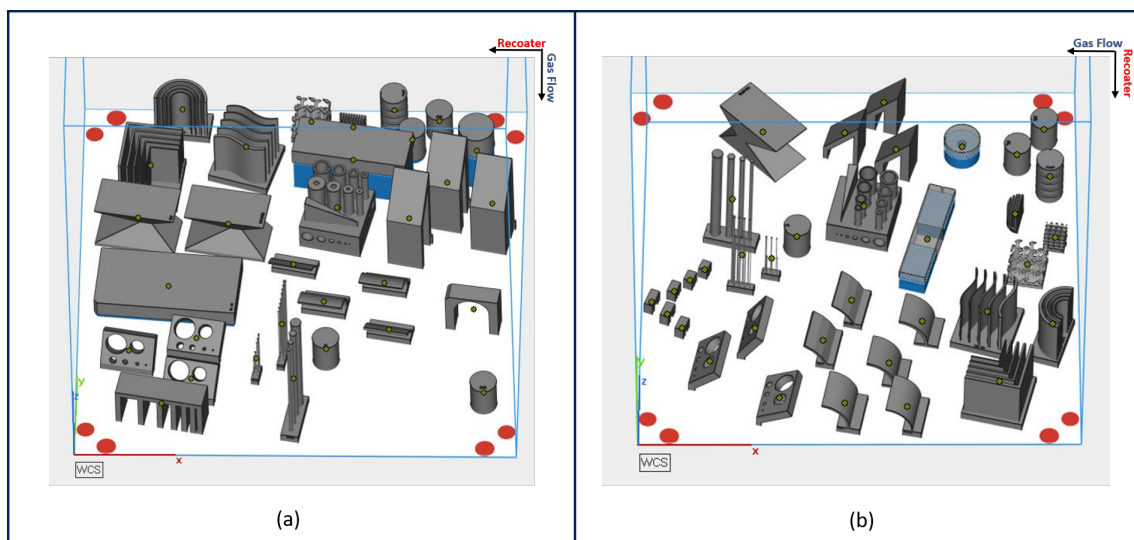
Build plate designed for (a) EOS M290 build (b) RenAM 500 build
